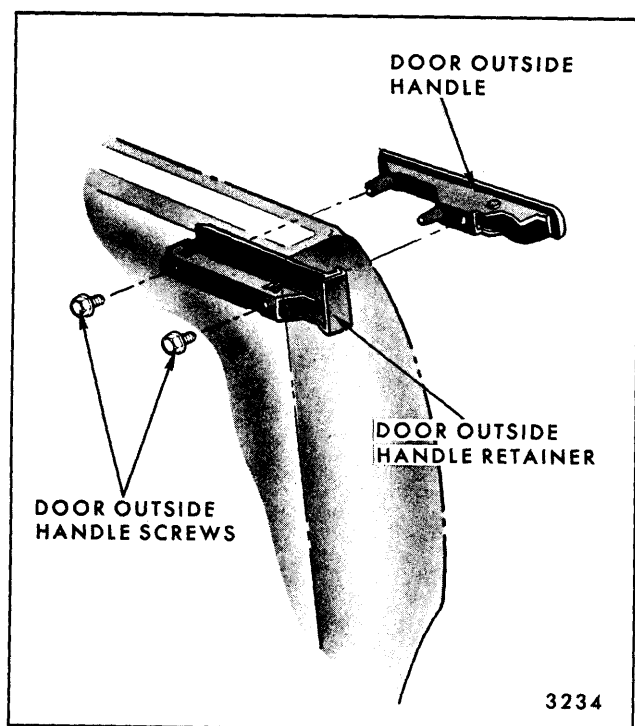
Door Outside Handle Removal - "G" Styles
